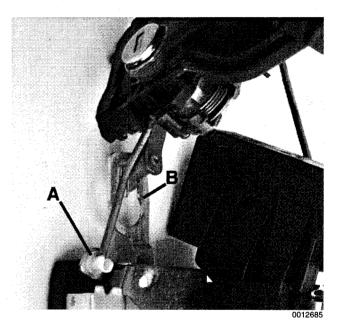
Pry out lock linkage (A) from plastic retainer. Lift door lock mechanism slightly to remove latching pin from lock gate (B). Door lock mechanism shown removed from door.
